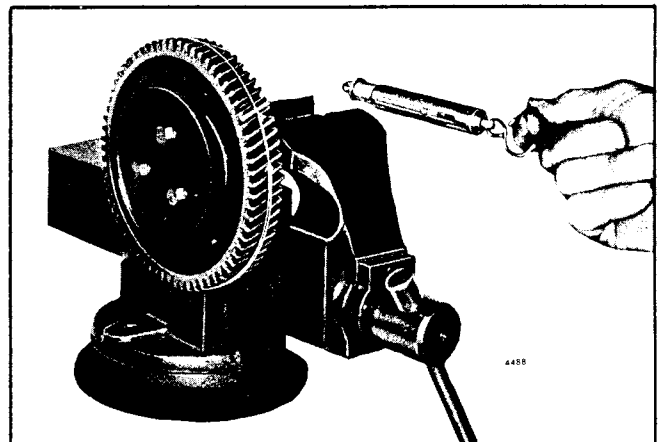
Checking Pre-Load of Idler Gear Bearing
